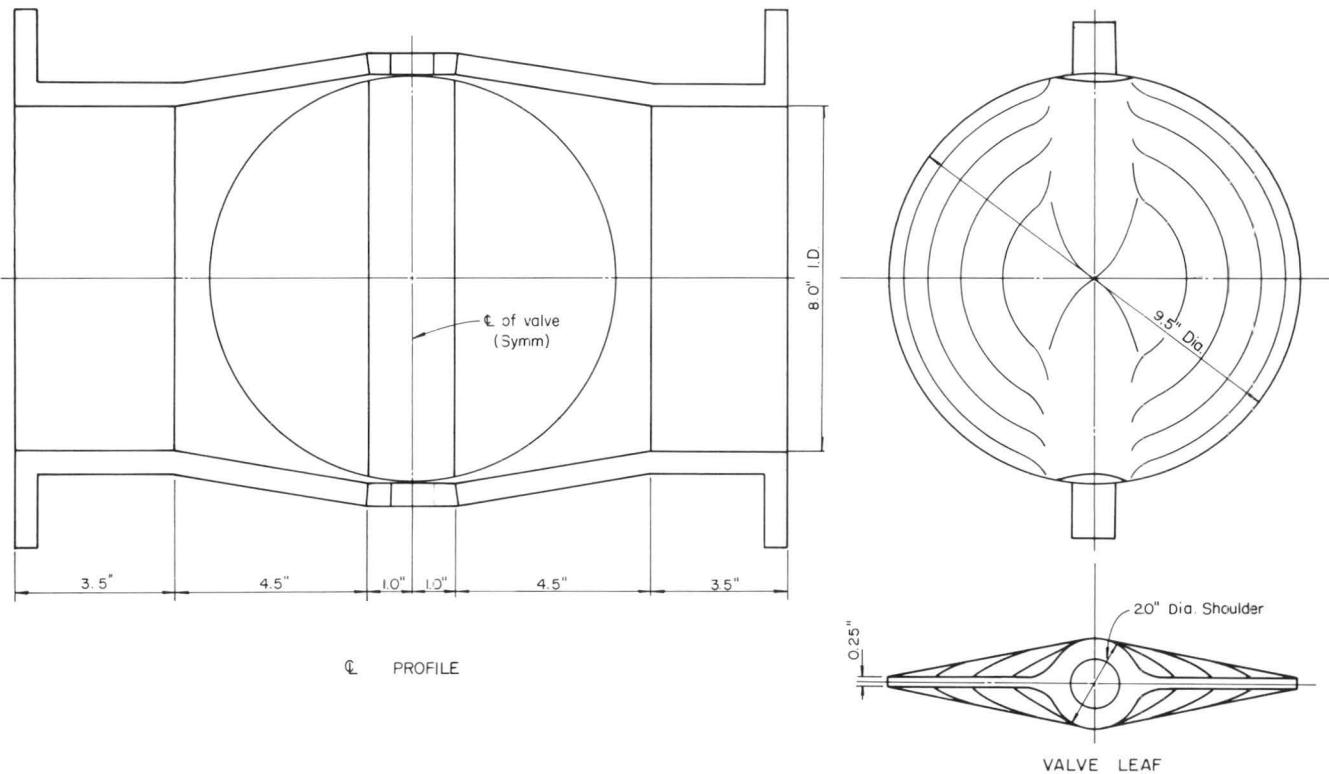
DETAILS OF BUTTERFLY VALVE
